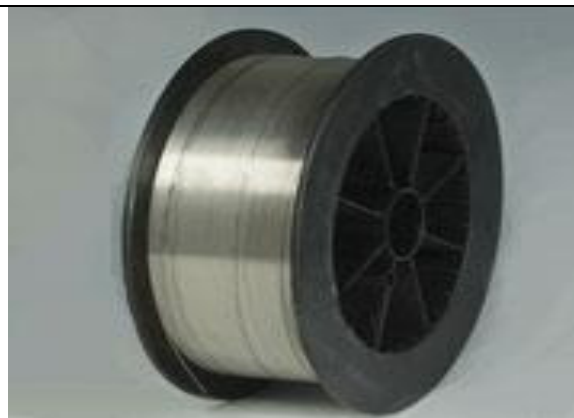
Type 316 filler material used for the MIG welding
